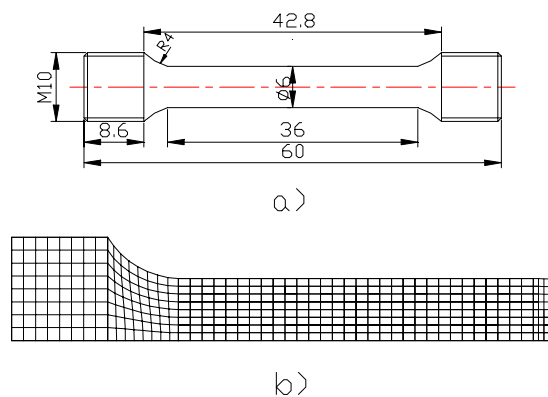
Cylindrical smooth specimen: a) dimensions b) finite element mesh
